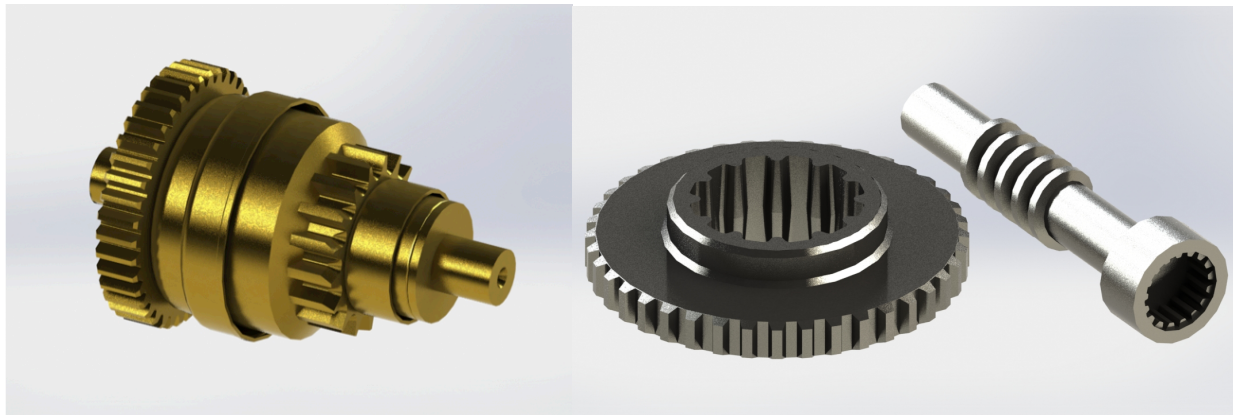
The Bendix drive (left) mates with the splined collar of the worm gear (far right)
